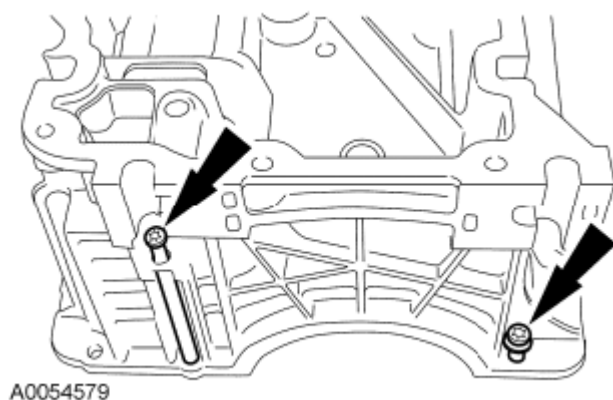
Locating Rear Cylinder Block Cradle Bolts
